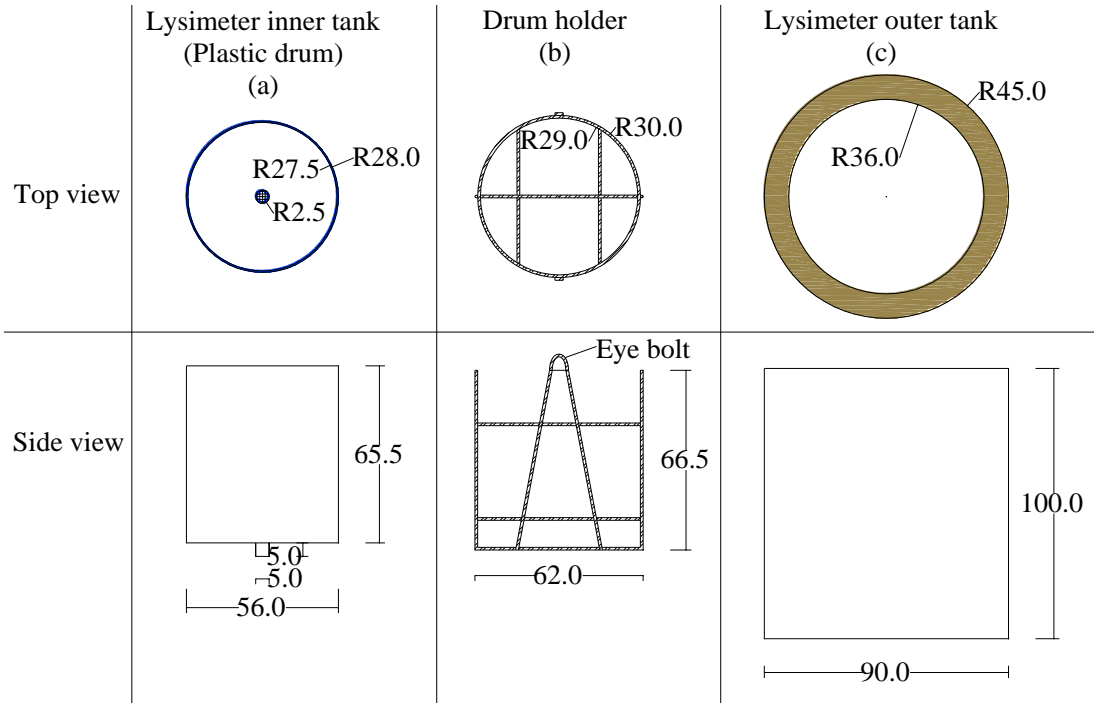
Top and side views of the design drawings for the inner tank (a), drum holder (b), and outer tank (c); all the dimensions are in centimeter
